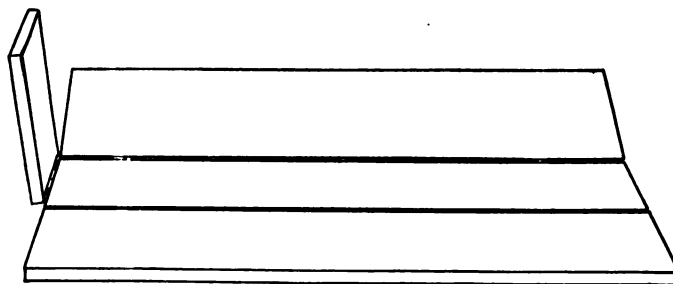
Fracture Box made of boards hinged so as to lay flat.
